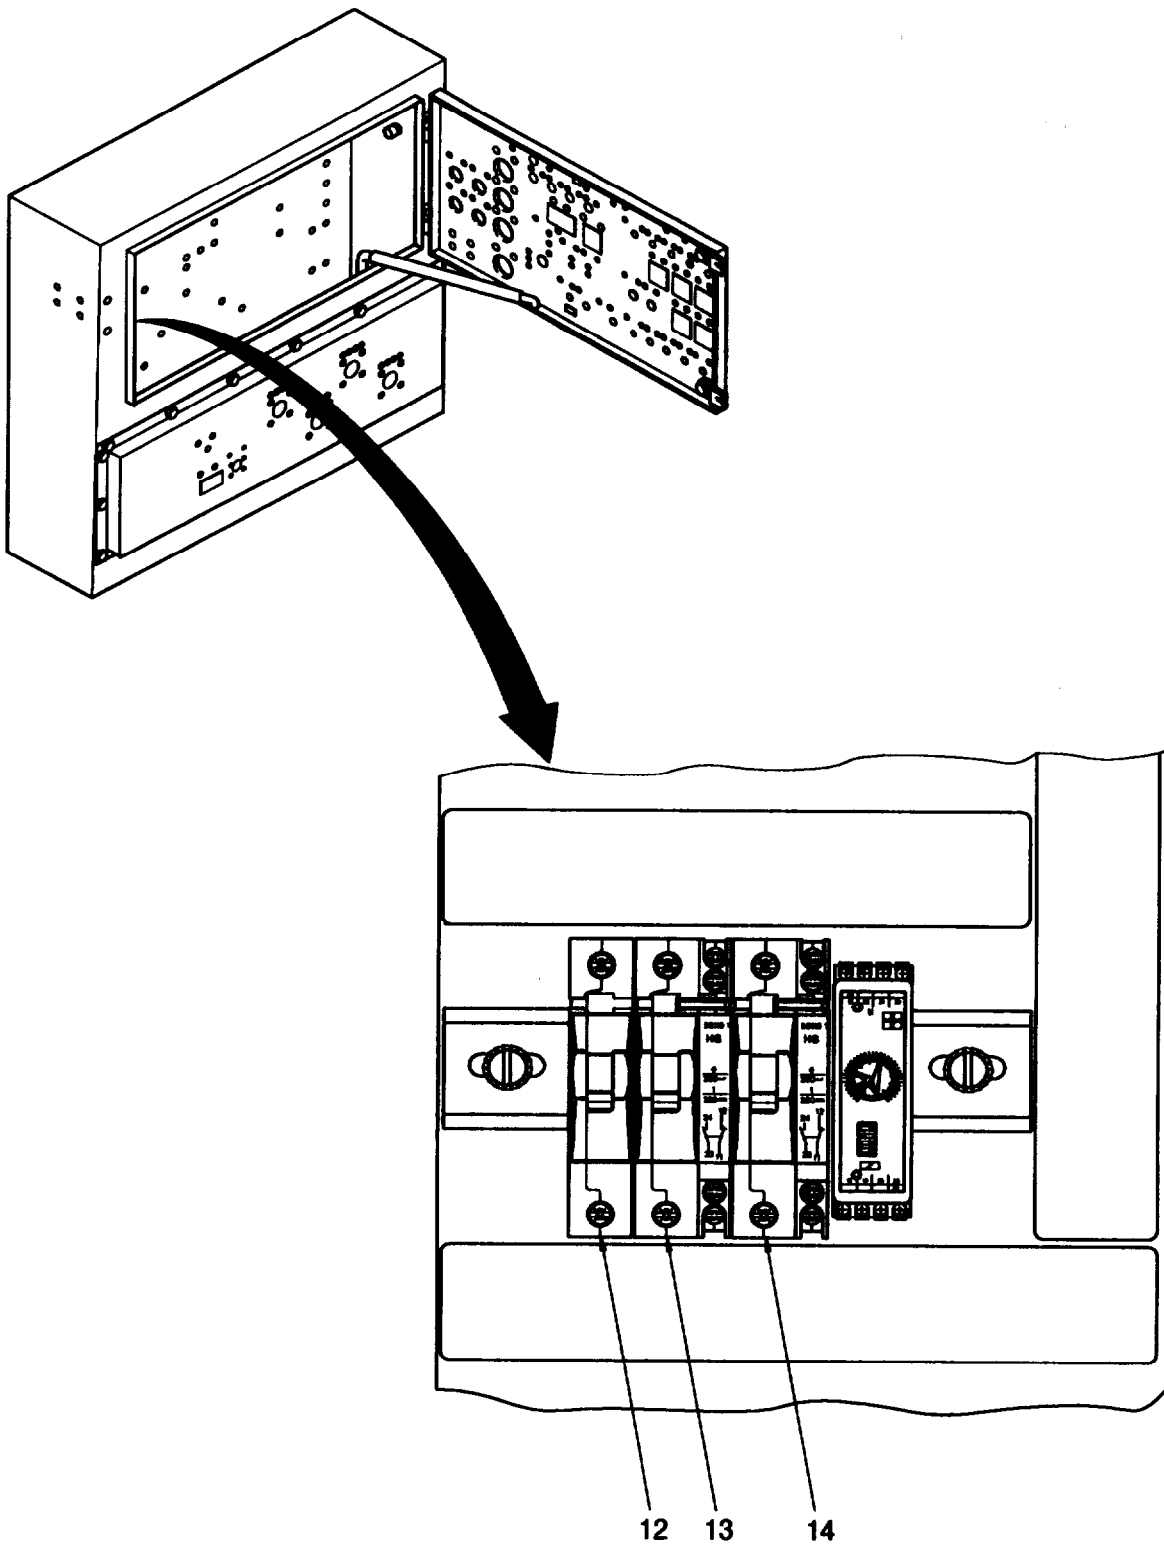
Control Cabinet Assembly, Circuit Breakers (sheet 2 of 2).
